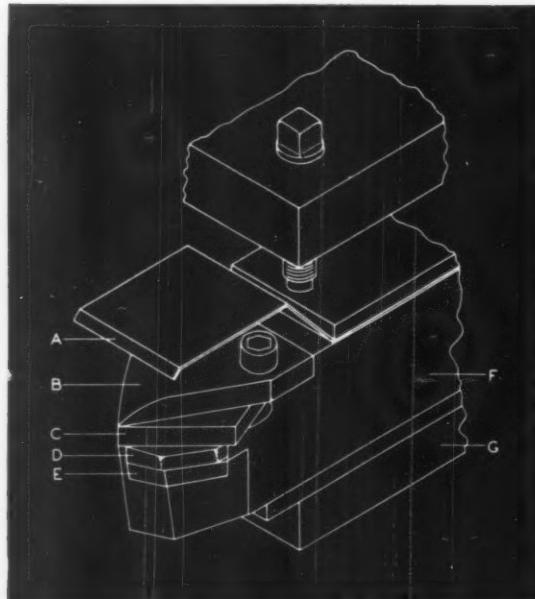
Special tool-holder has chip shield (A) for turning cast iron with ceramics. Other parts are clamp (B), carbide chip-breaker (C), ceramic tip (D), support pad (E), tool-holder shank (F), and toolpost (G).
